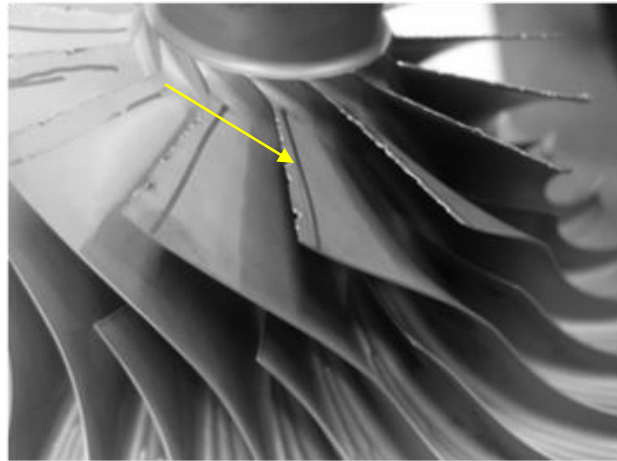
View of the compressor rotor damaged by foreign objects [2]
